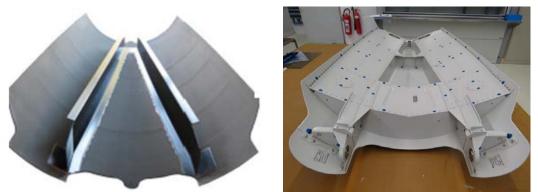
Outer shell with bonded spars (left) and Airbrake demonstrator after final assembly (right)
